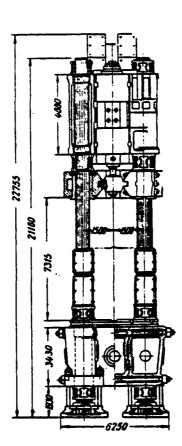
Hydraulic forging press by effort/force 12600 t.
